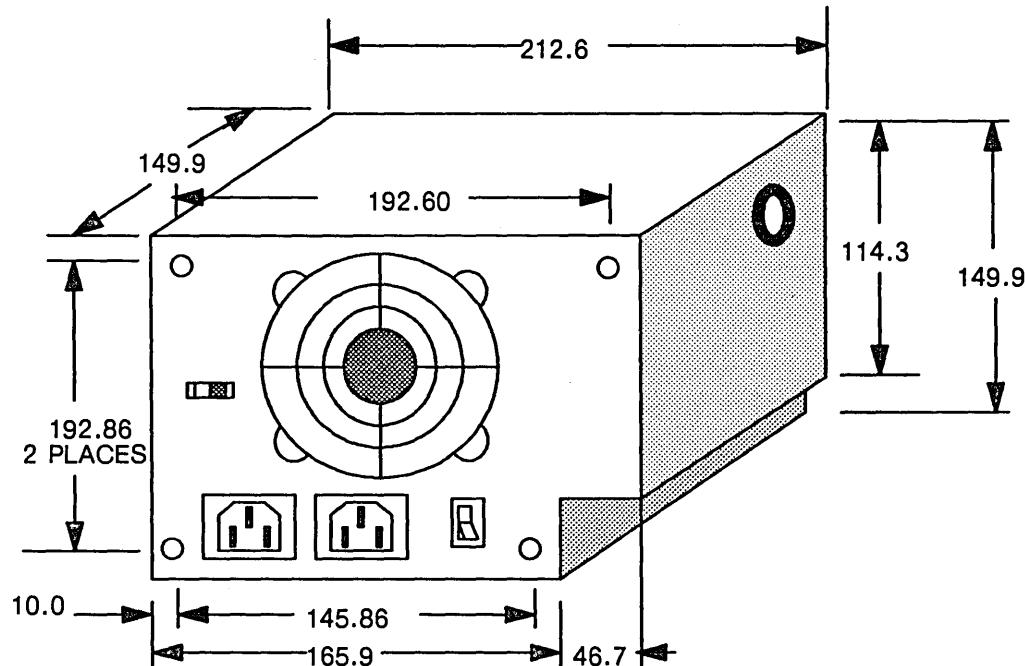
Power Supply Physical Dimensions (Centimeters)
